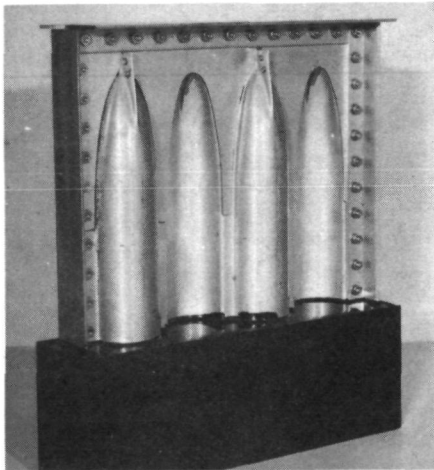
SINGLE SHEET END CLOSURE SHEAR TEST SPECIMEN
